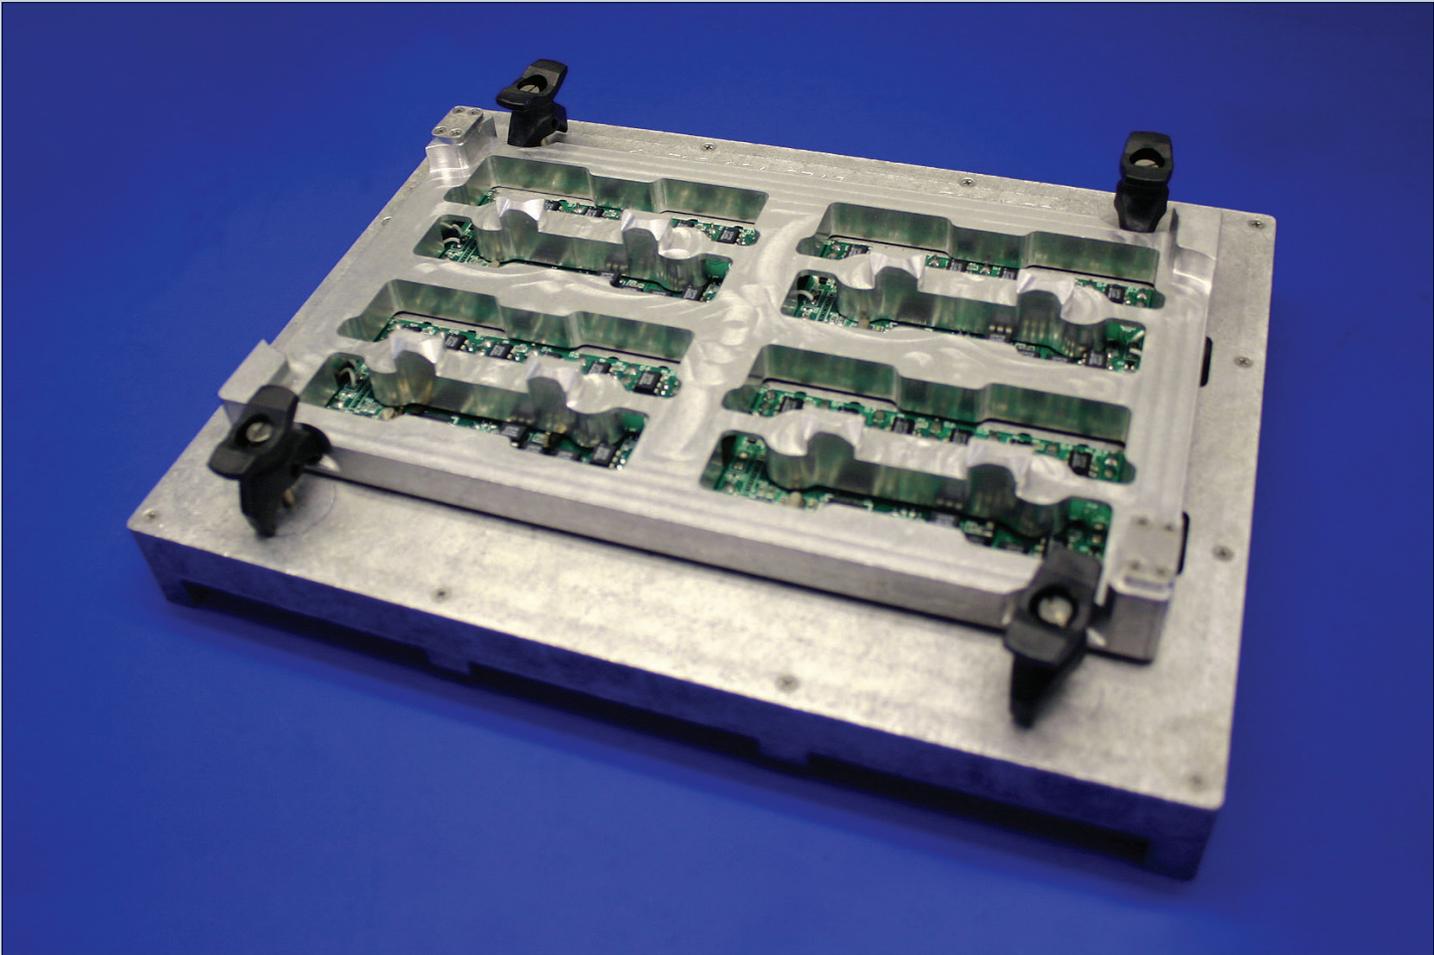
Masking fixtures are designed to mask all areas of an assembly that cannot have coating applied and are designed specifically for the assembly in question.
